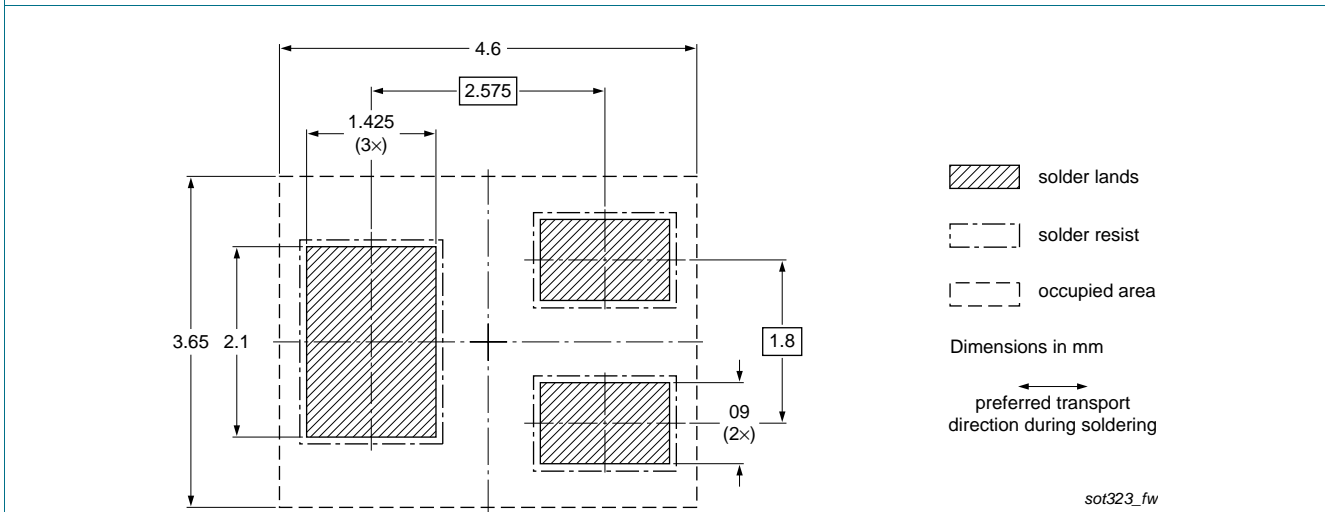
Wave soldering footprint for SOT323 (SC-70)
